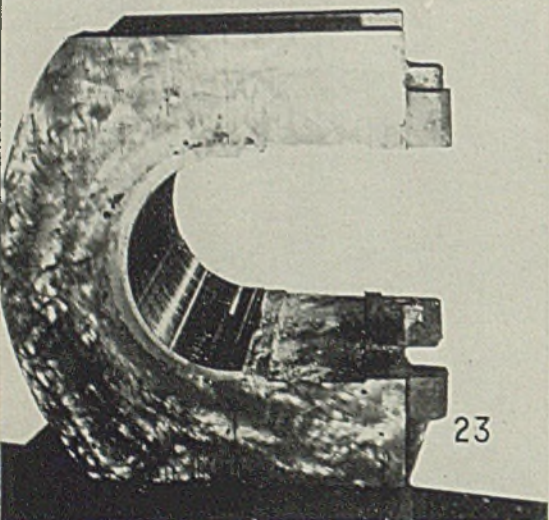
Locomotive driving box fabricated from three flame-cut parts. This is typical of many parts now difficult to obtain but which can readily be fabricated from stock plate and billet forgings
